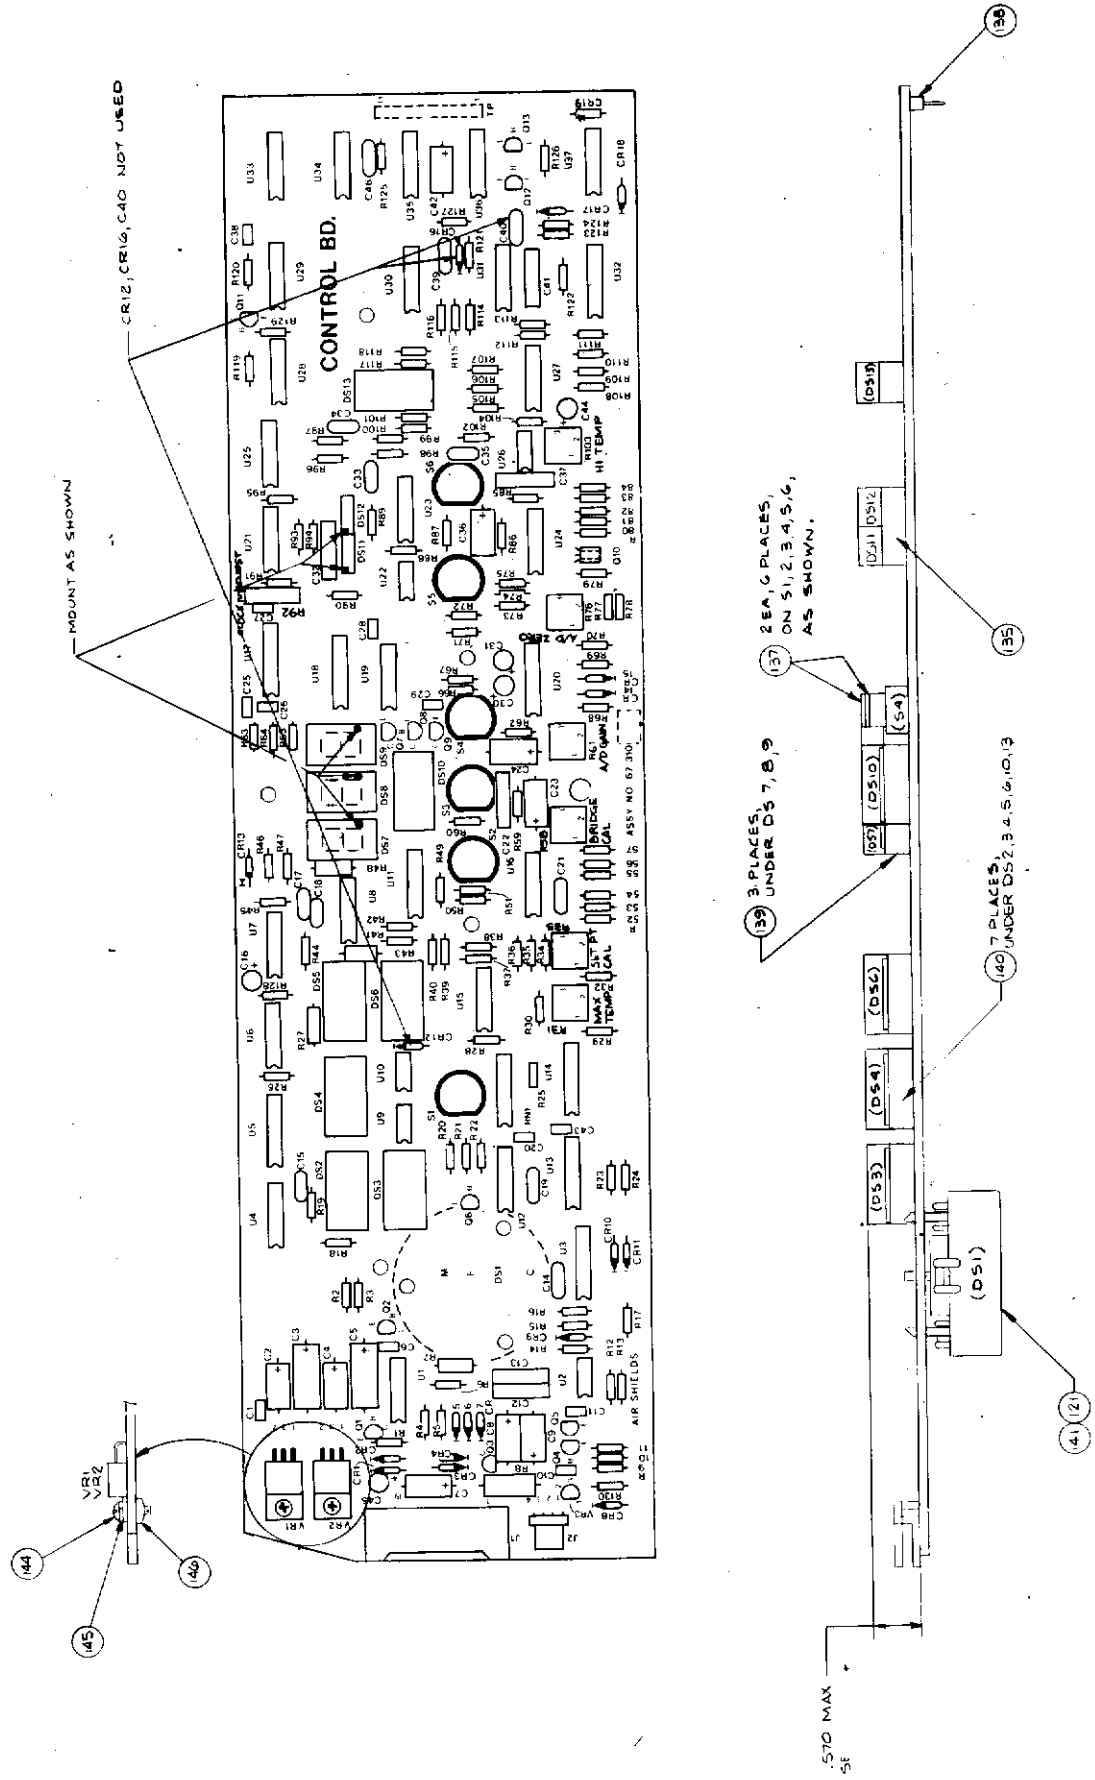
PARTS LOCATION DIAGRAM, CONTROL BOARD ASSEMBLY
